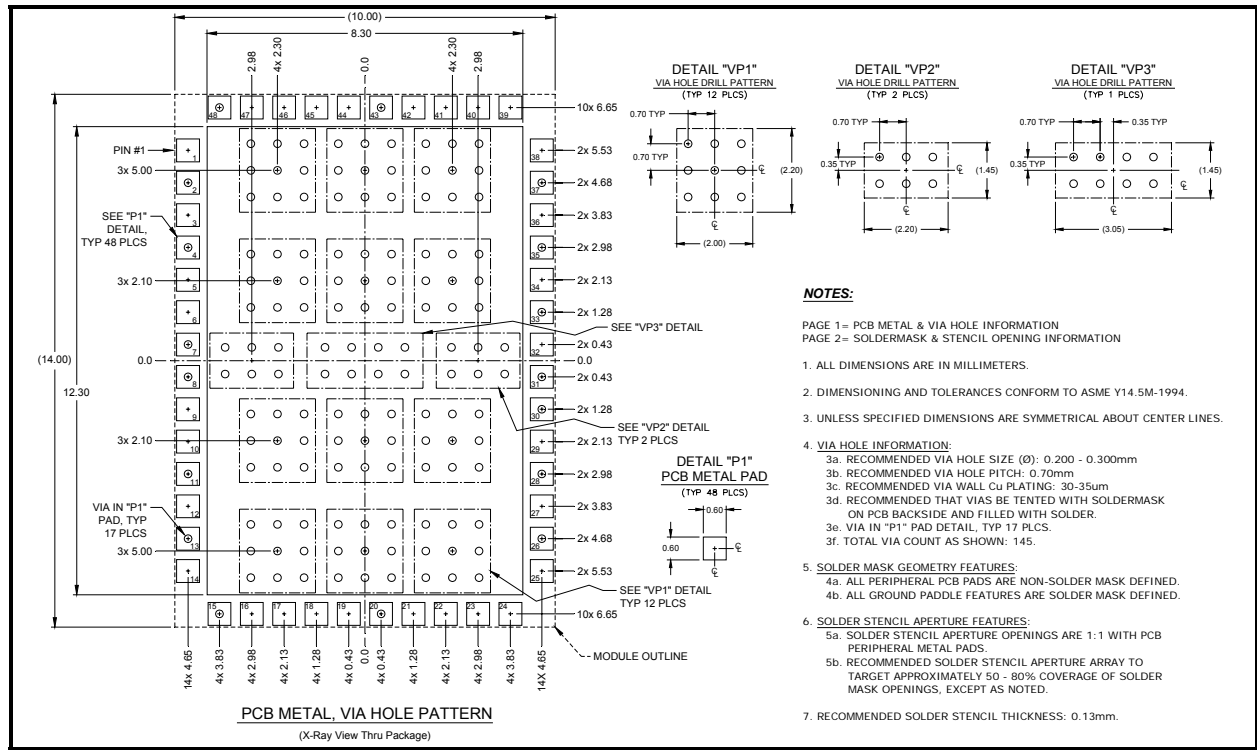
Recommended PCB Footprint - PCB Metal, Via Hole Pattern (209-DWG-01_Rev_1p0)
